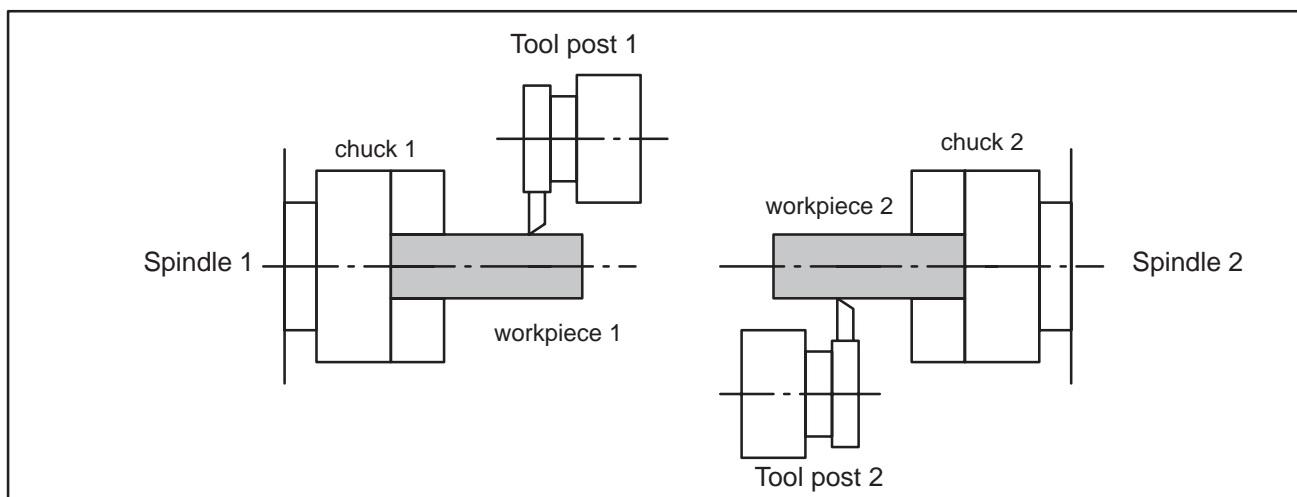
(b) Application to lathes with two spindles and two tool posts
